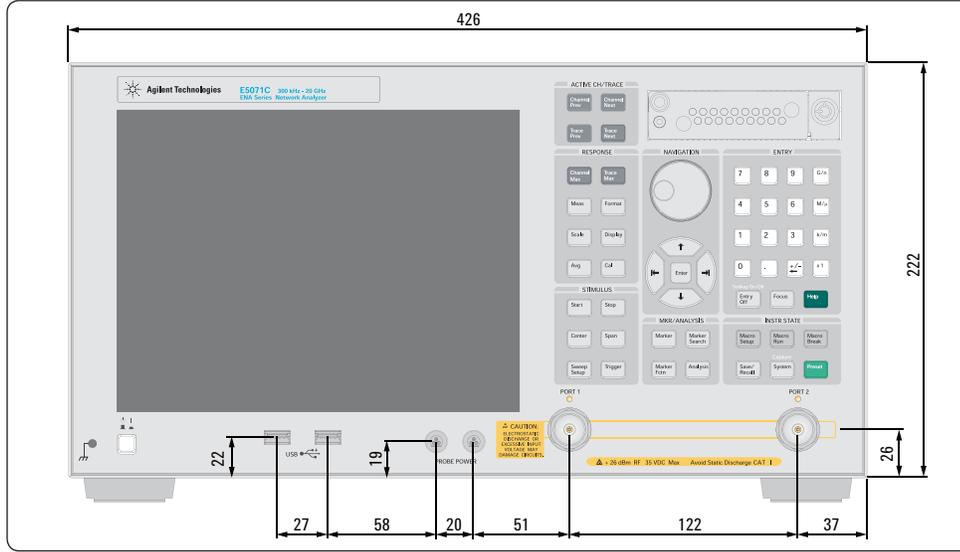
Dimensions (front view, E5071C with Option 2D5/2K5, in millimeters)
